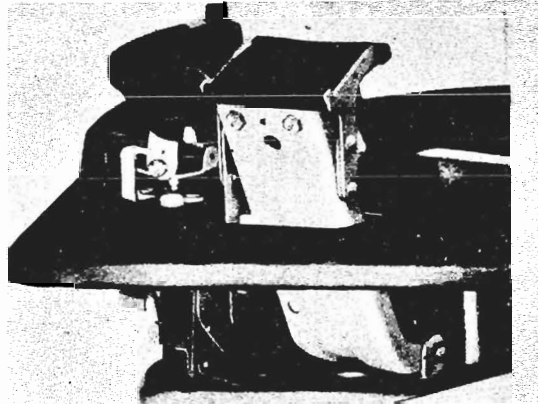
REAR VIEW WITH CENTER ESCUTCHEON REMOVED
